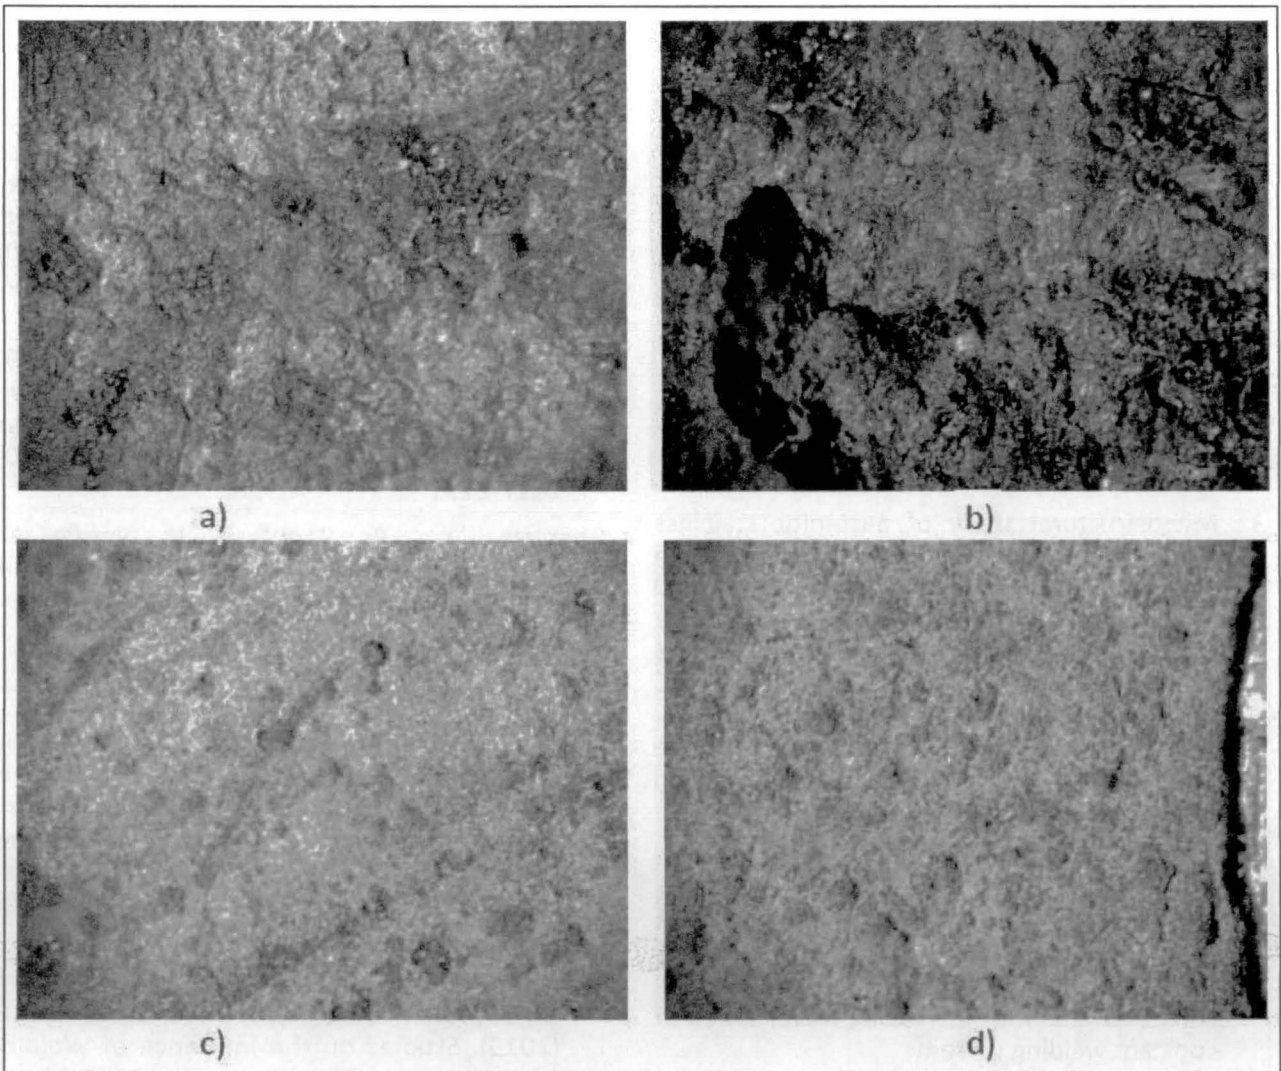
(a-d). Photograph of corroded surface of cladded zone after corrosion test of austenitic stainless steel cladded test.
